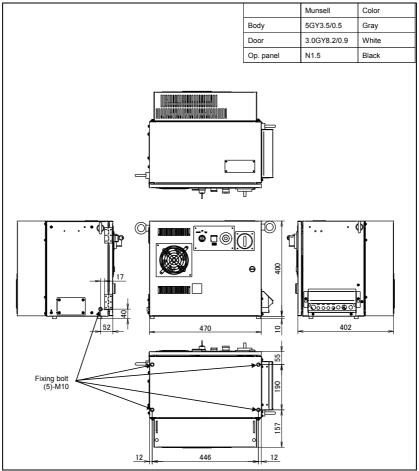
(e) Controller external dimensions (R-30iB Mate Controller)
